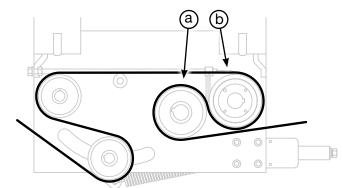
Drive box, pinch roller (a) & drive roller (b)
